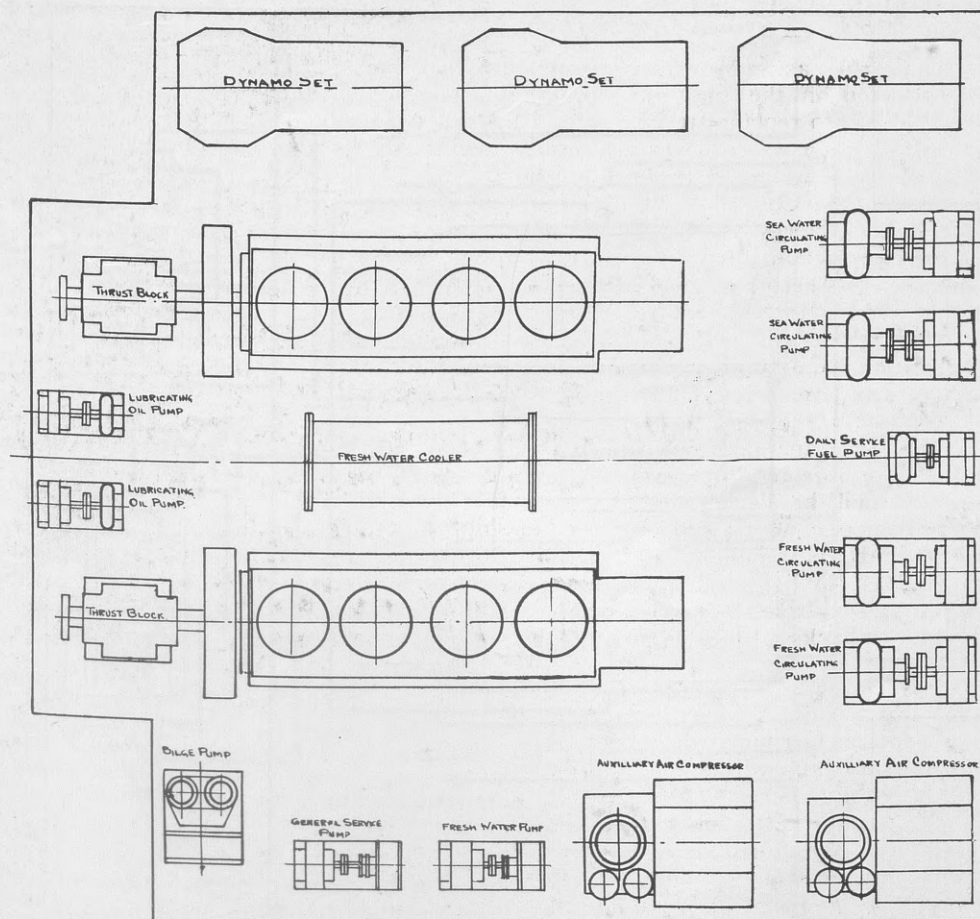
Lay-out of the principal auxiliaries of a twin-screw motorship
